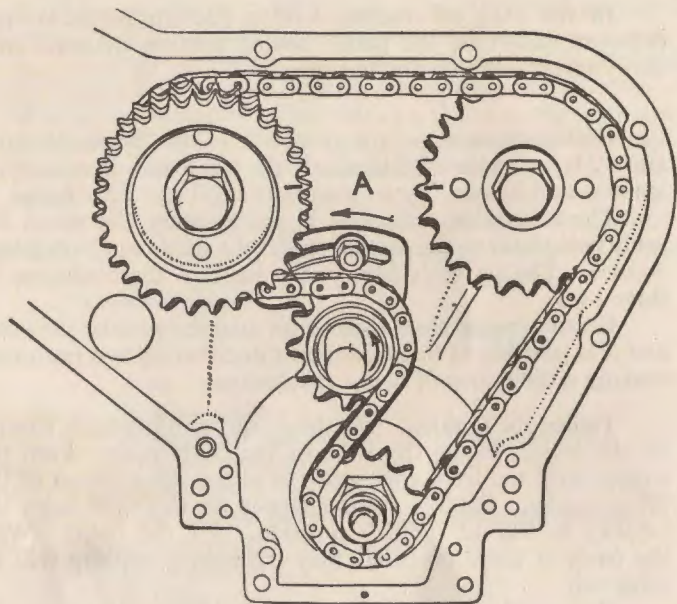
Timing marks and direction in which eccentric and locking plate must be moved in order to adjust the timing chain.
